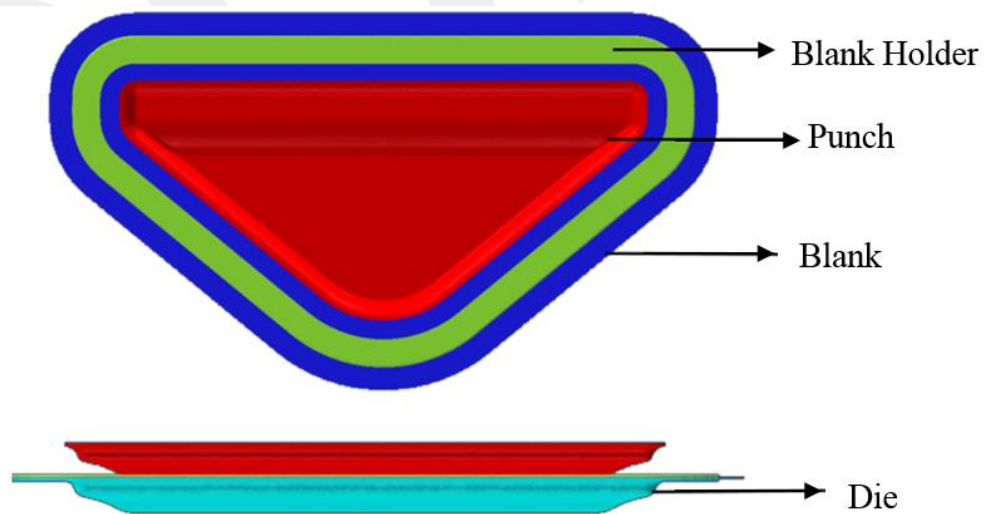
The top and front view of the die set for forming first design cooling group's sheet metal cover
